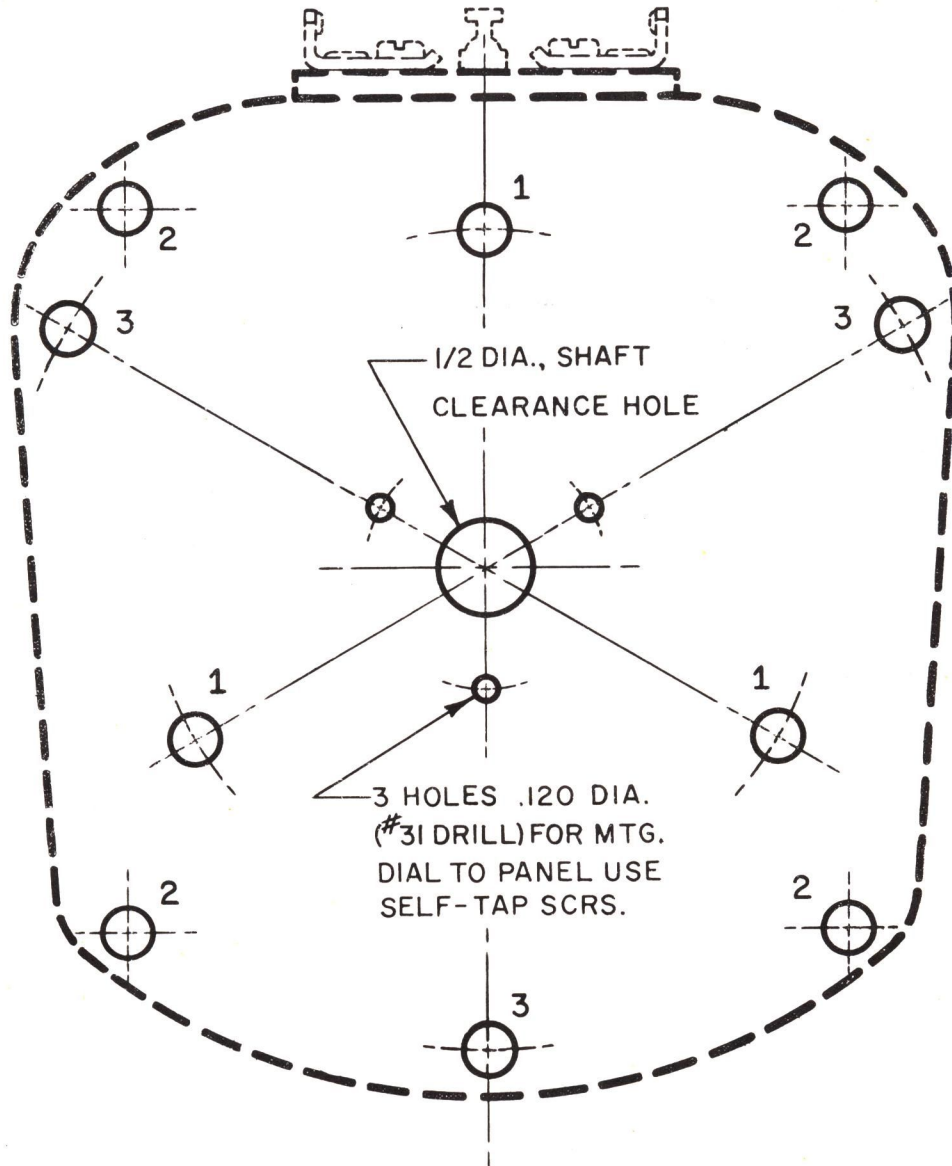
Template for mounting of single and tandem, unenclosed VT8 series transformer assemblies.
